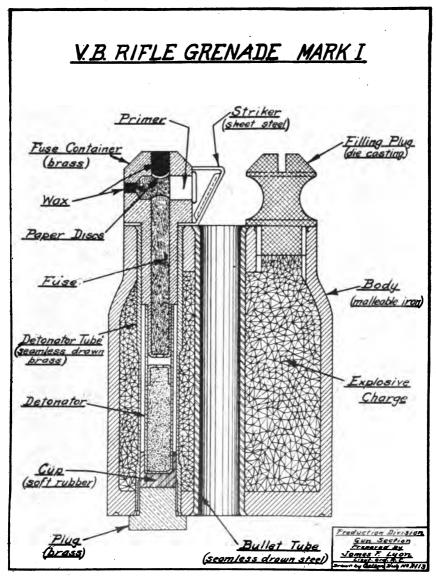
Detailed sectional view of the V.B. rifle grenade, Mark I.
